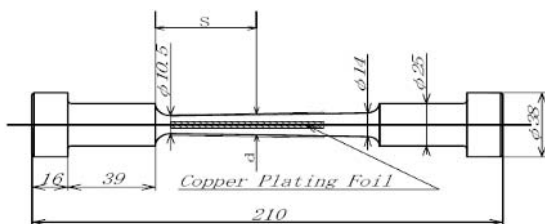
Tapered calibration specimen (Dimensions in mm)
